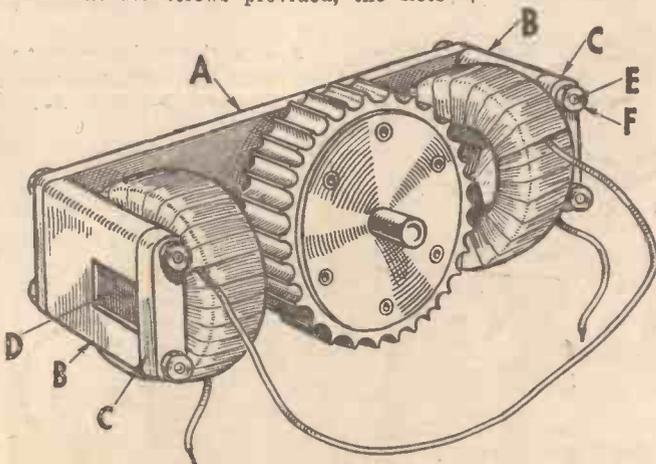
The assembly of the complete synchronizing apparatus. Note that the two magnetizing coils are wired in series.
